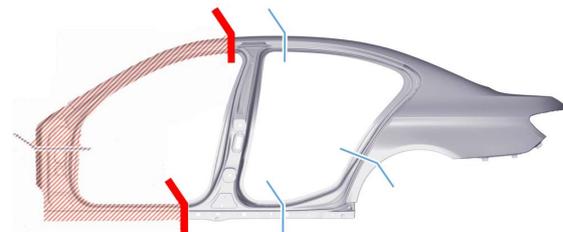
Red marked severance cuts at the side frame (blue marked: further preferred cuts) [2].
